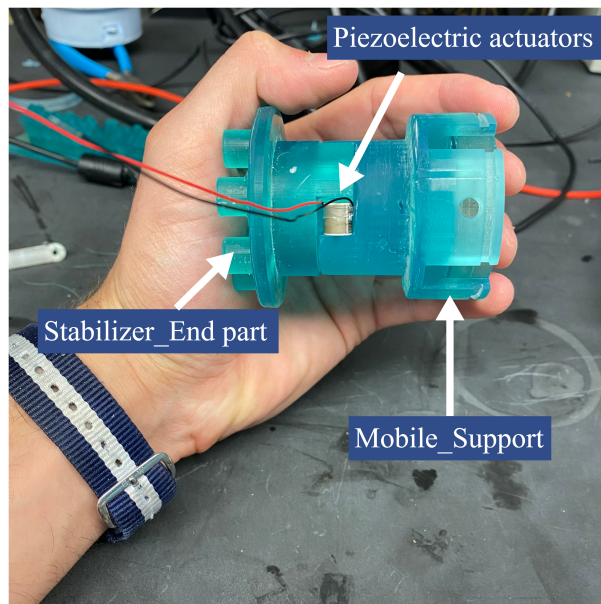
Coupling between the Stabilizer_End part and the Mobile Support.
